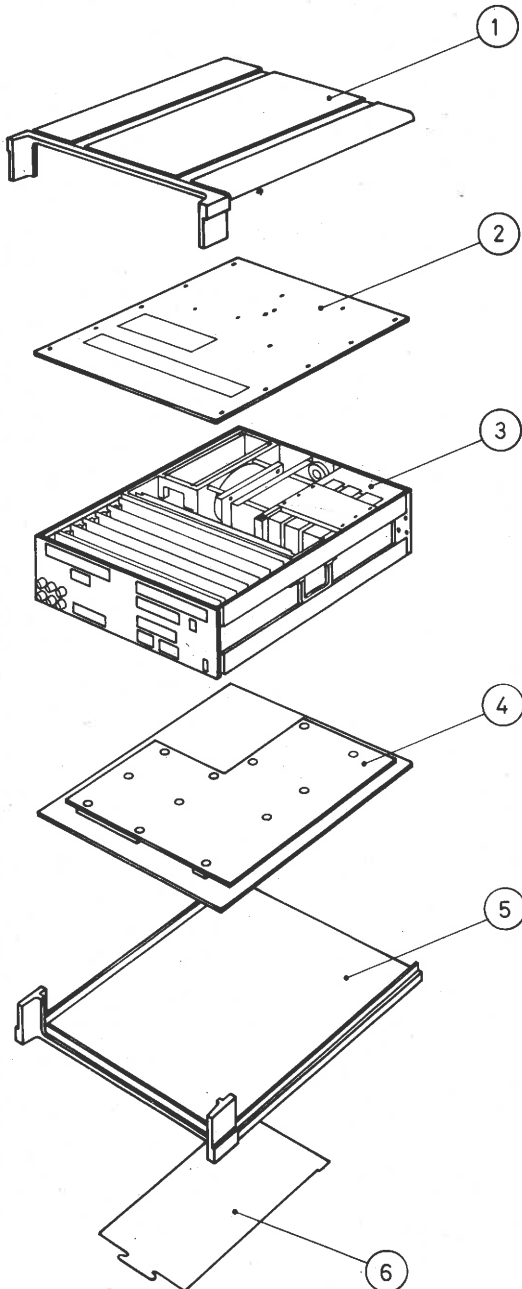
EXPLODED VIEW OF INSTRUMENT (For detail)
